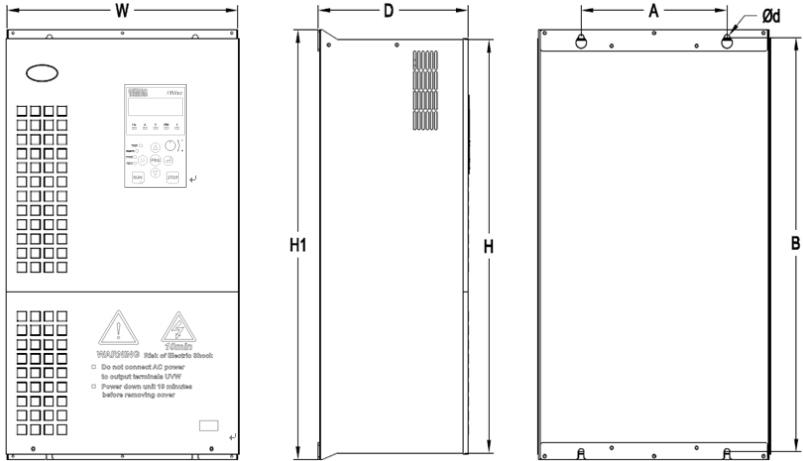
Product Outline, Mounting Dimension Schematic diagram
